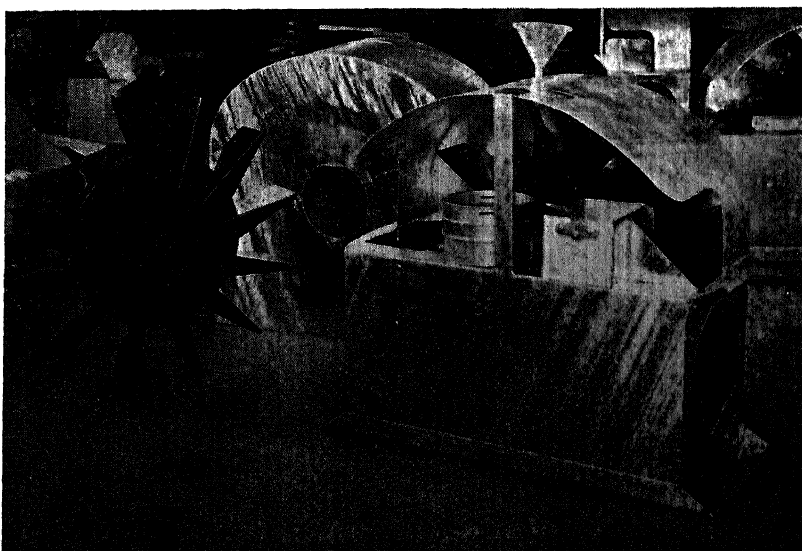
Special mud sampler for use in oil well drilling, built from 16-gauge black iron by arc welding. Galvanized after welding.
